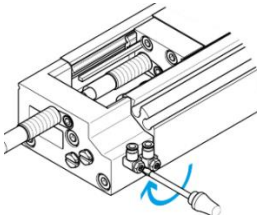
CLOSE THE THROTTLE CHECK VALVE
